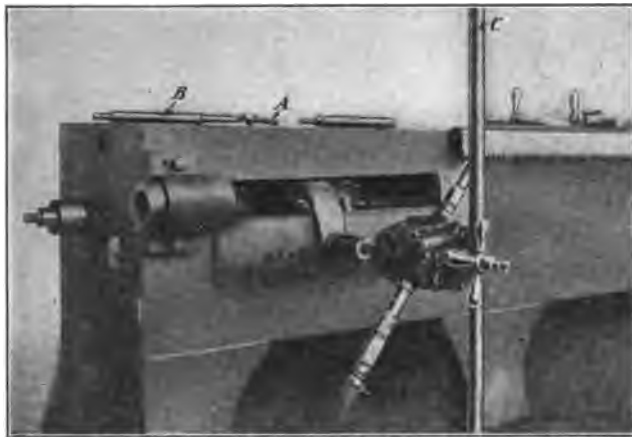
Method of Drilling and Reaming the Holes in the Lathe Bed for the Tumbler Locking Pins
